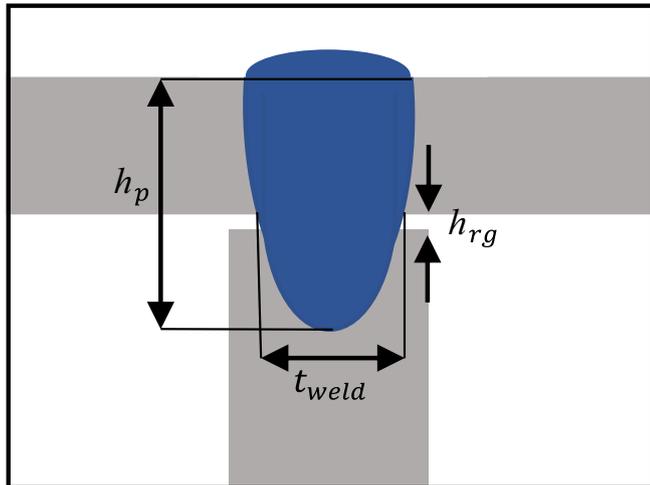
Illustration of laser weld geometry parameter.
